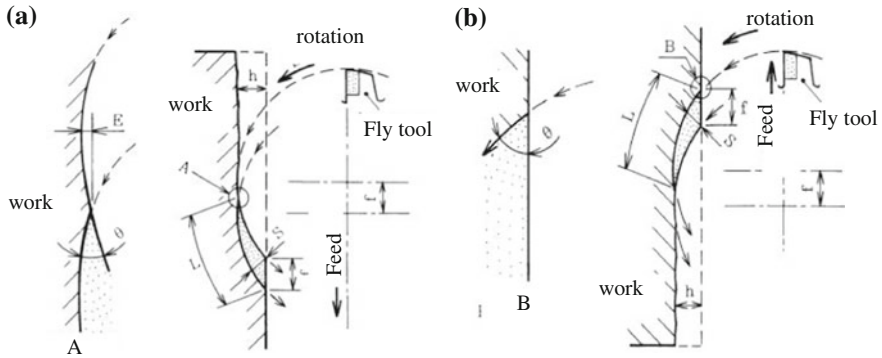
Difference of cutting shape caused by up cutting and down cutting (a) up cutting (b) down cutting
